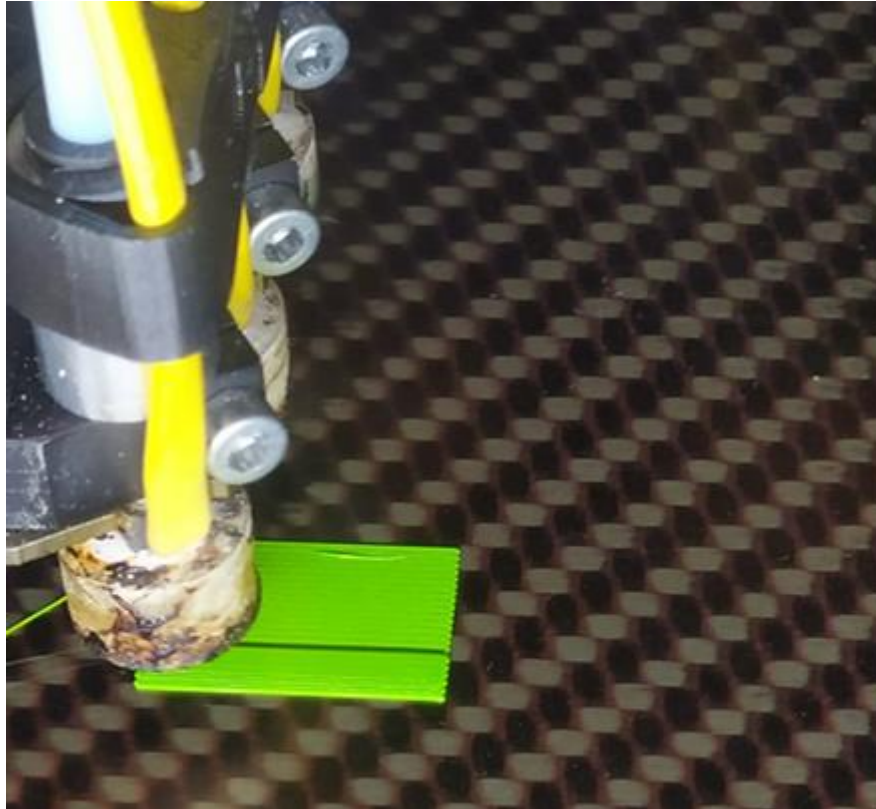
printing in progress for the specimen design by Fulcontrol. The machine has finished printing the first layer.
